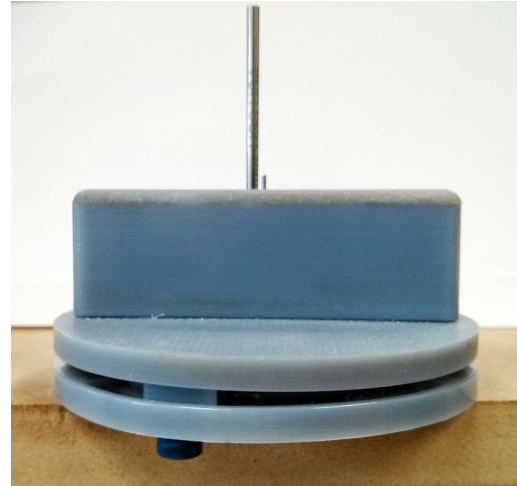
Second iteration feed through bender (low angle) showing failed attempt due to slipped wire: 1 - bending teeth, 2 - wheel for mounting bender, 3 - flat bending shield, 4 - stent wire
